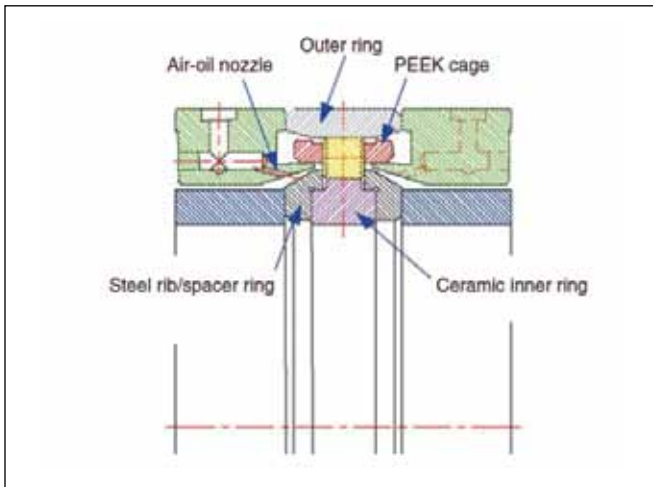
N-type cylindrical roller bearing with ceramic inner ring.
